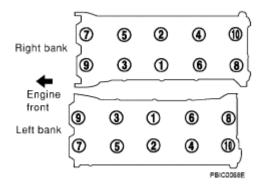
Identifying Cylinder Head Bolts Tightening Sequence
